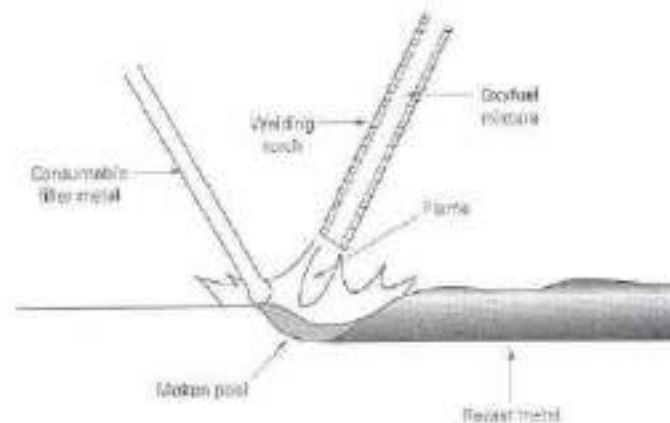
Schematic of oxyfuel gas welding with a consumable welding rod.
